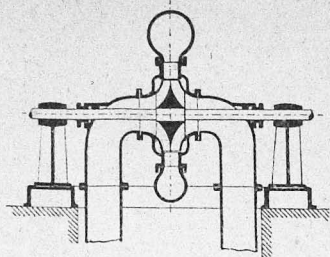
DOUBLE SPIRAL TURBINE WITH TWO DRAFT TUBES.
